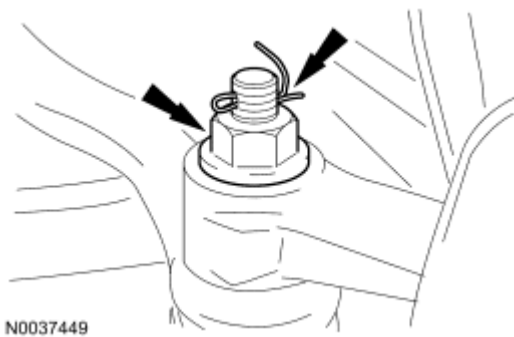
Locating Tie-Rod Ends Nuts And Cotter Pin
